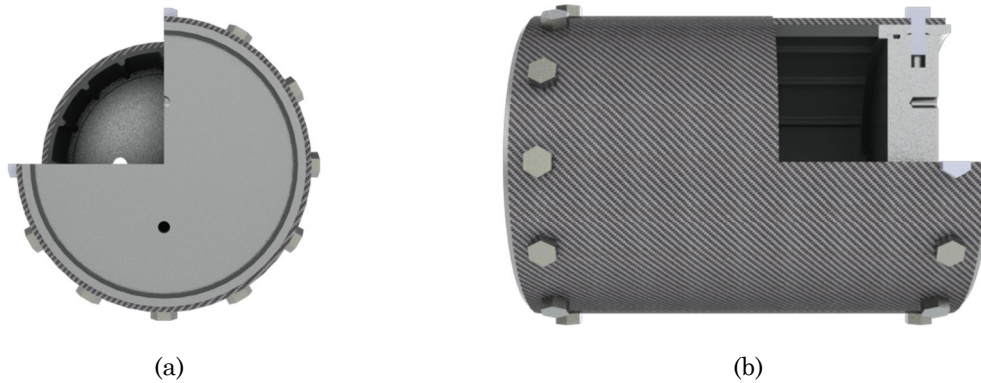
CAD model of pressure drum with partial cross-section view of (a) ribs and (b) flange arrangement
